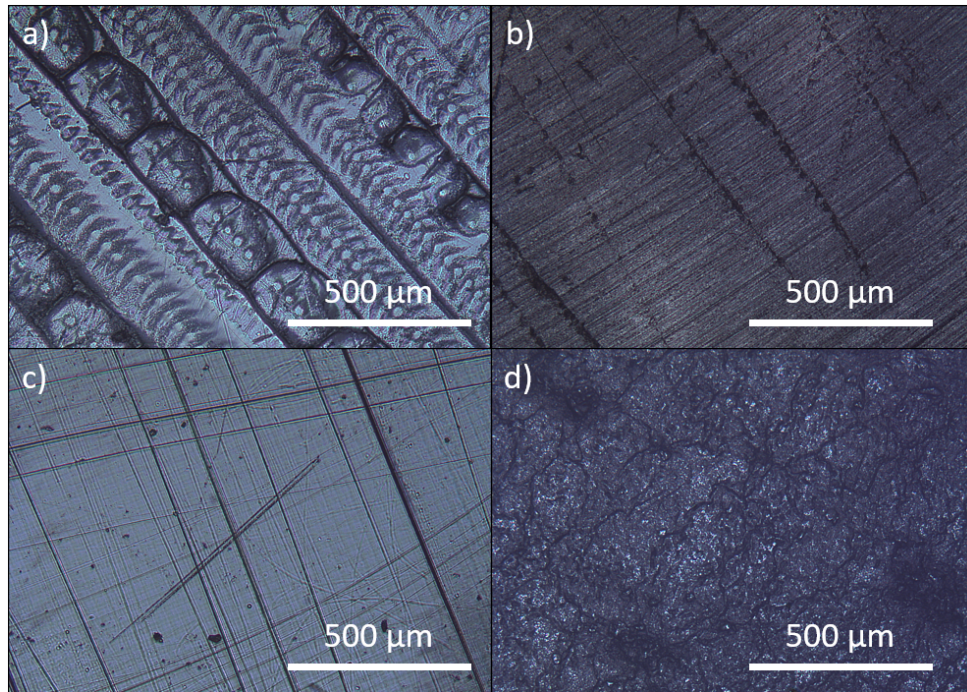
Microscope images of the sealing surfaces of different valve configurations with 50x magnification; a) polyjetted valve without post-processing; b) polyjetted valve with post-processing (polished); c) DLP printed valve; d) silicone sealing mat.
